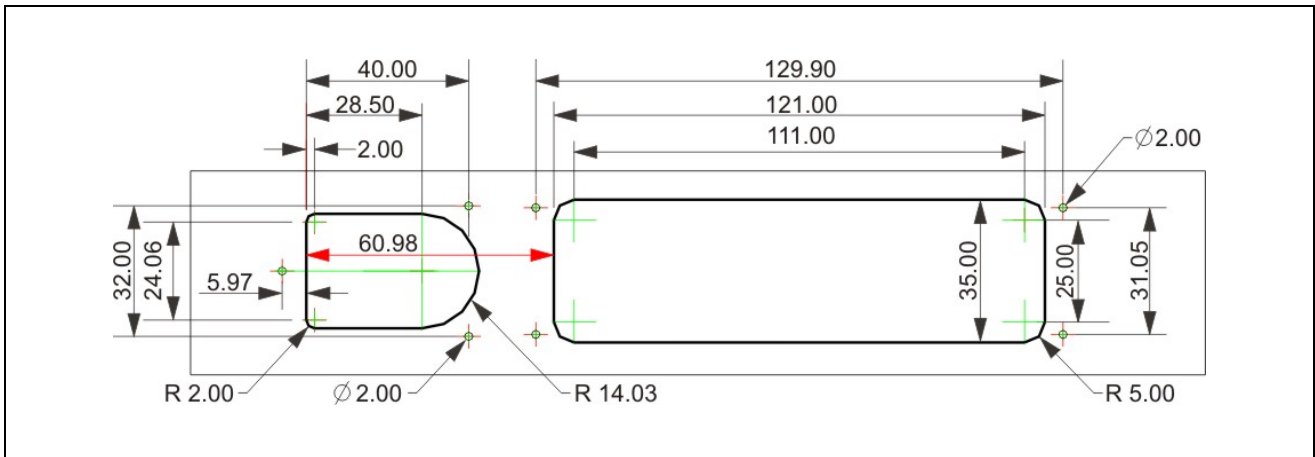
Fixing hole positioning diagram of HCS-4325/26 series congress unit with HCS-4327D/50 (unit: mm)
